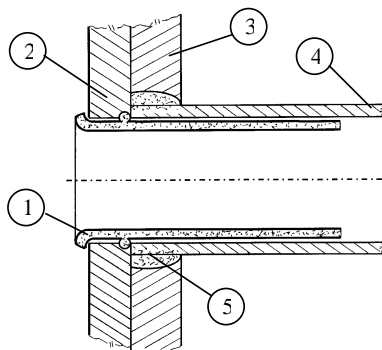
The set-up of inlet tube (1) in fireclay (2) and tube-sheet (3), (4) – tube made of STN 15 020 steel, (5) – weld.
